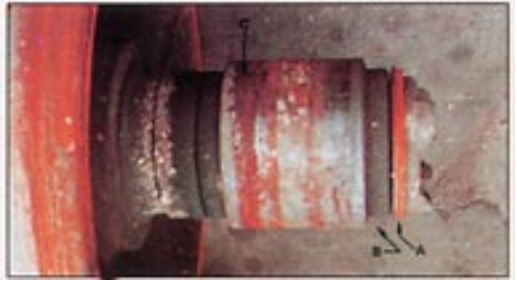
Adapter has been displaced to outboard end of bearing. Thrust shoulders has worn away the end cap rim (A) and has displaced the outboard seal (B). Inboard thrust shoulder has been riding on the outer race over the inboard load zone
